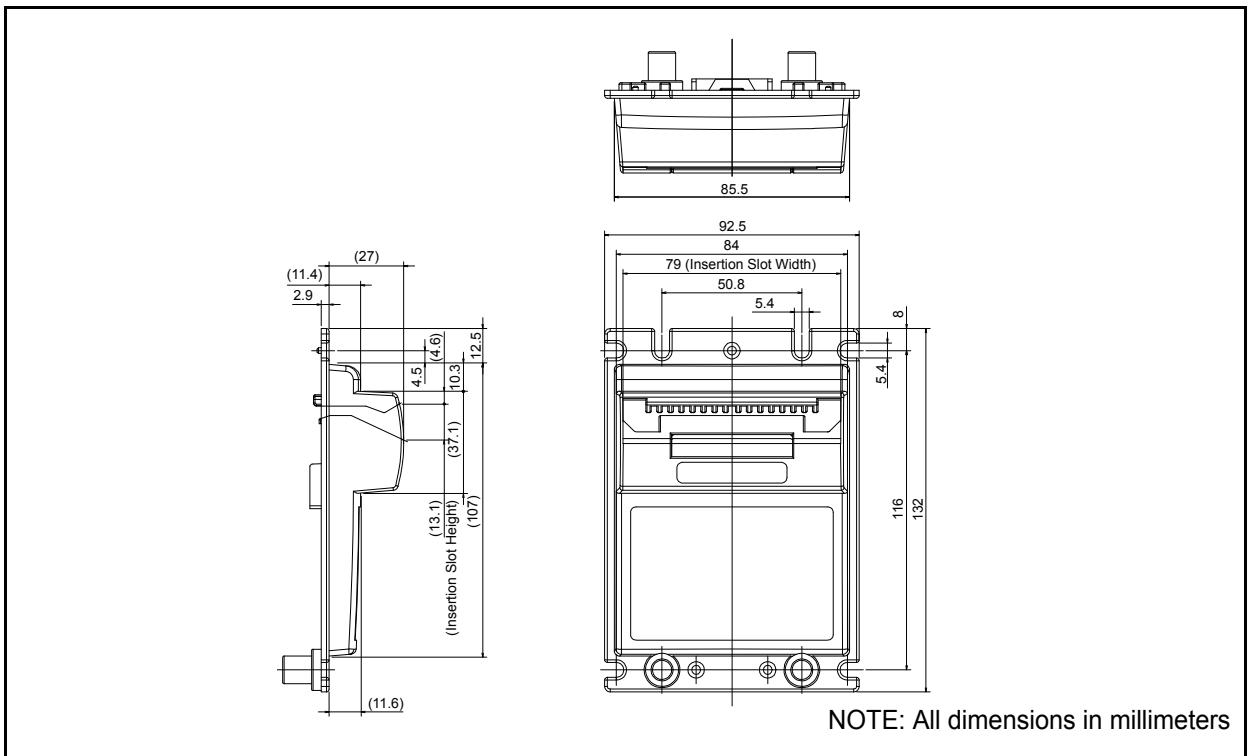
DBV-500 Bezel Type1 Outside Dimensions
